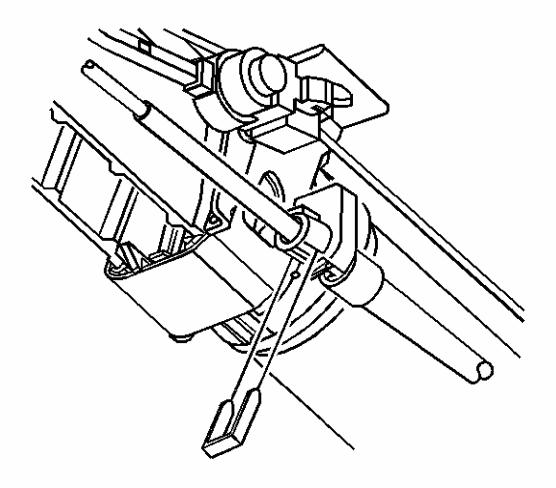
View of Shift Cable Retaining Clip Courtesy of GENERAL MOTORS CORP.
